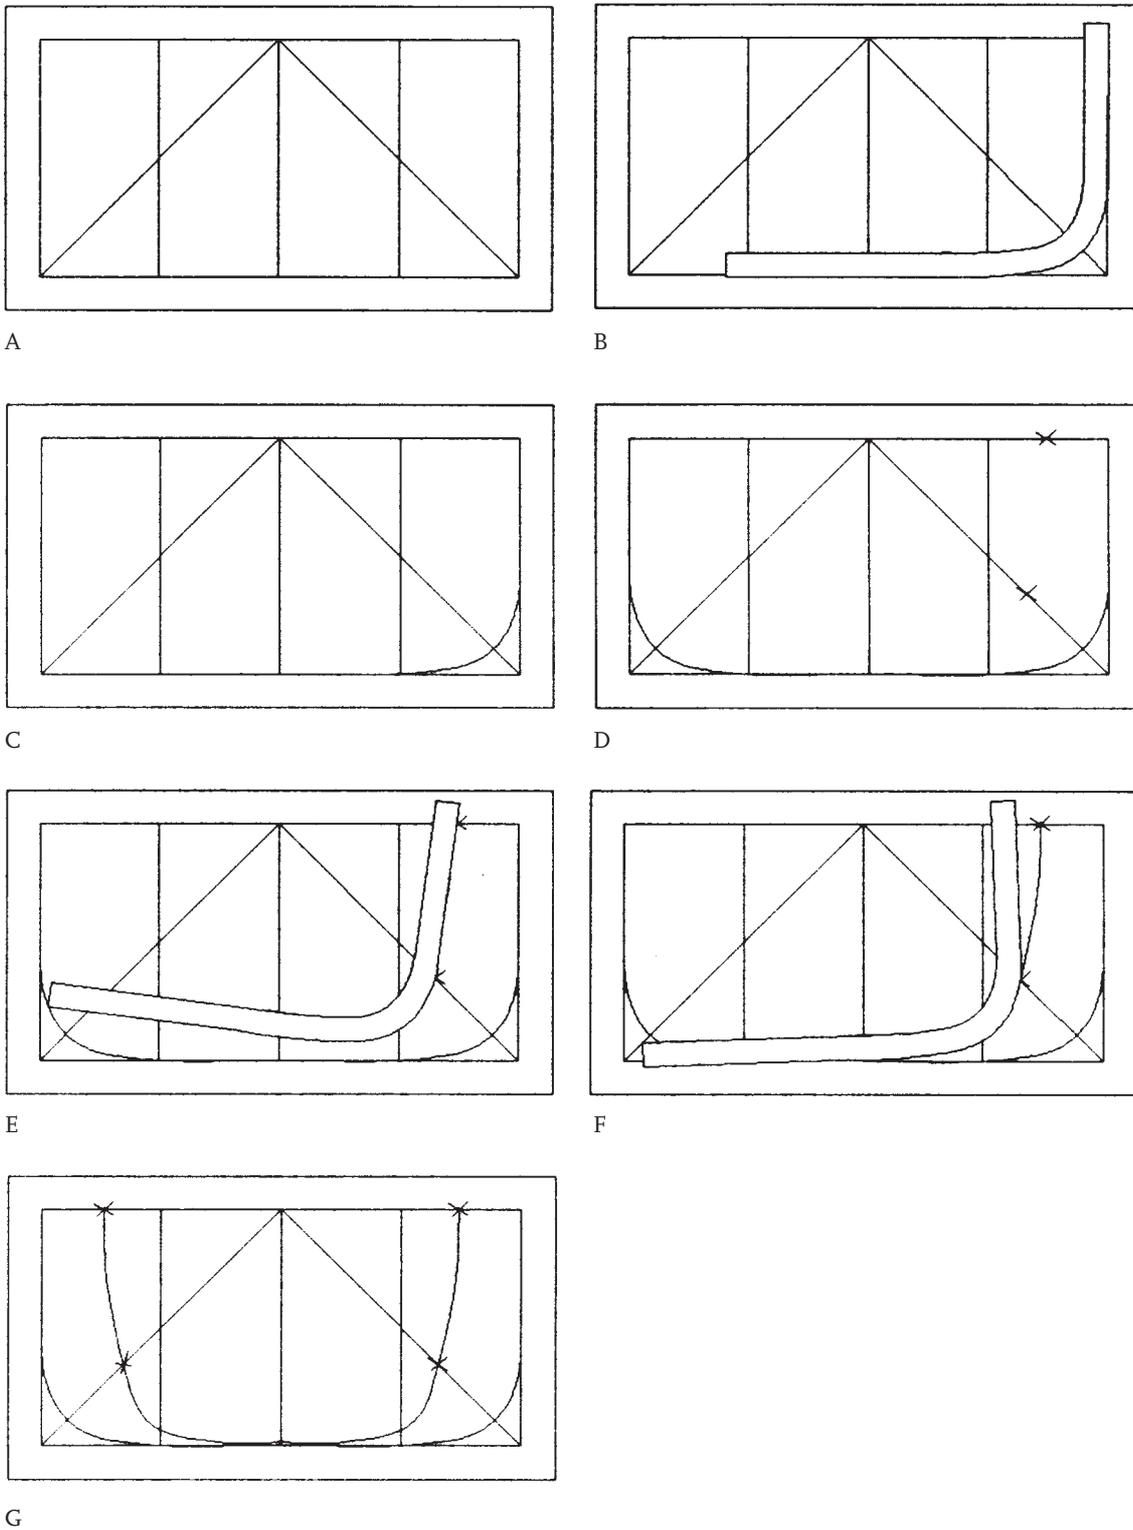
Diagram to illustrate the design of *vattai* frames using a scribe board and a single mould. Drawing: E. Kentley
